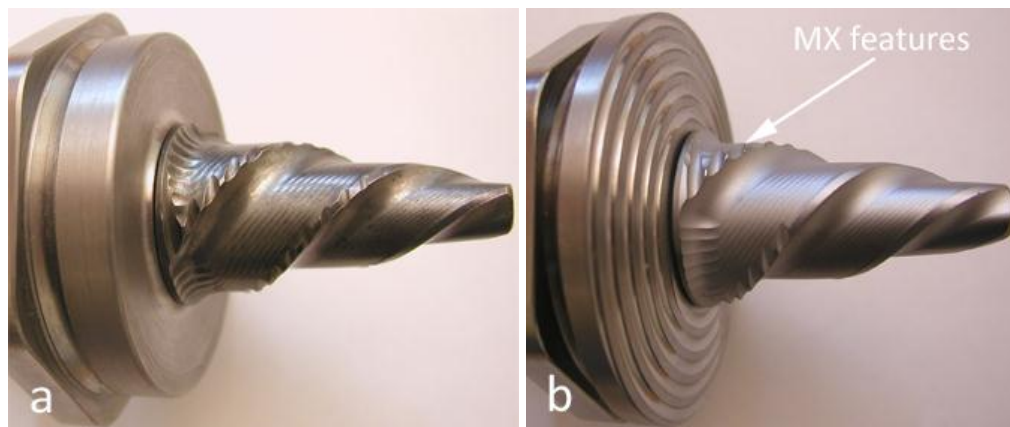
Past (a) and present (b) welding tool.
